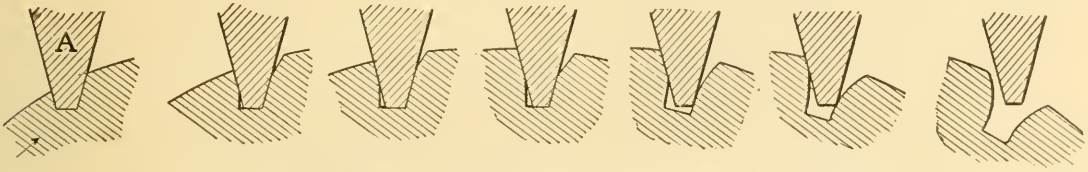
ACTION OF THE TOOL IN GENERATING A TOOTH.
